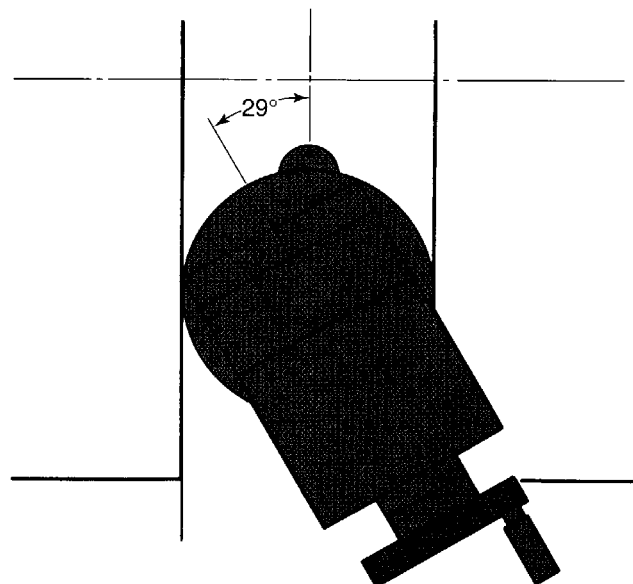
The compound rest is set up for machining right-hand external threads.
